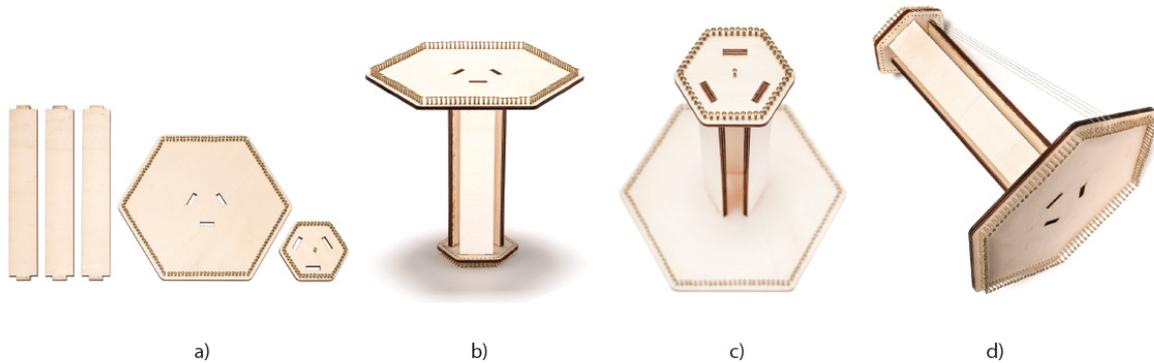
3D loom boards and assembled views: a) disassembled boards, b) base view, c) top view, d) weaving seaweed-thread sample, from authors, photos by Luís Silva Campos
